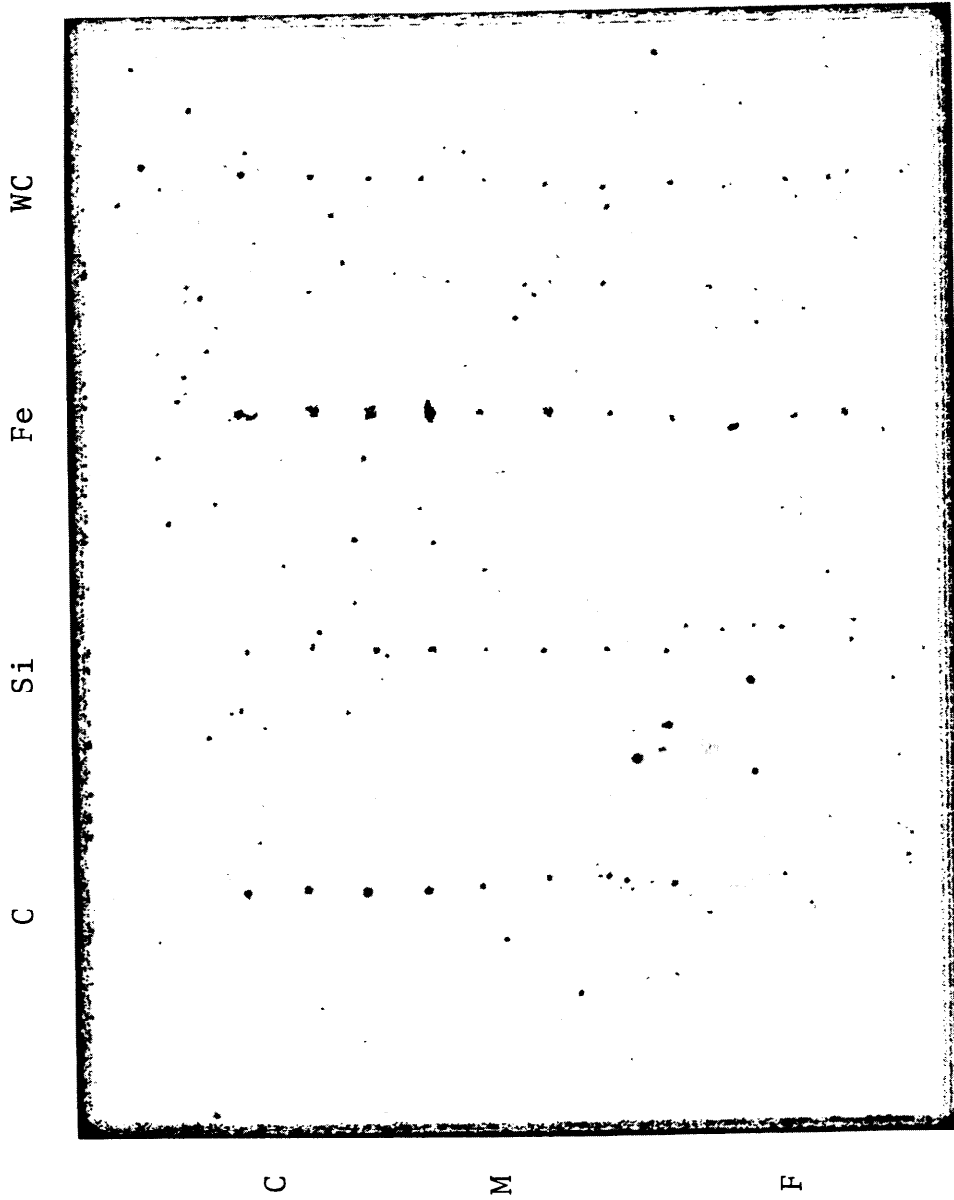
C-scan recording of NC-132 HPSN bottom billet, turned over, in machined condition
